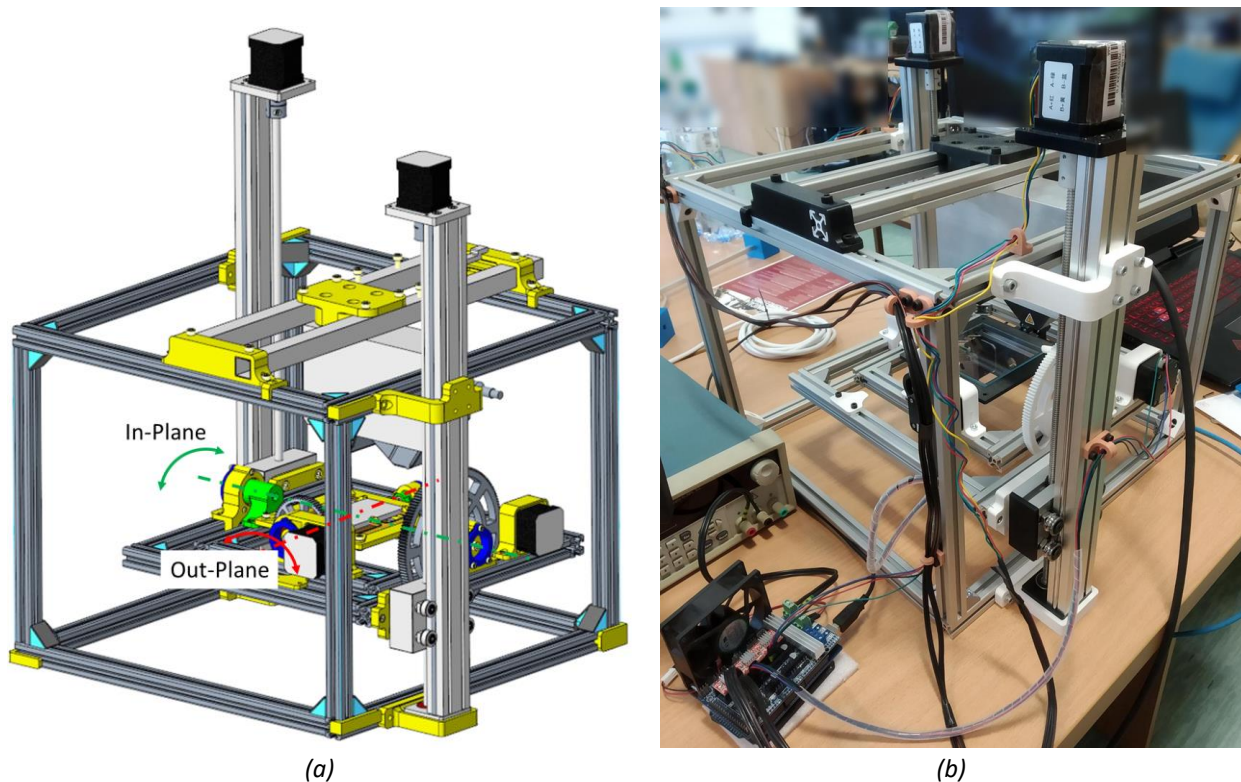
(a) CAD model of positioner; (b) experimental workplace.
